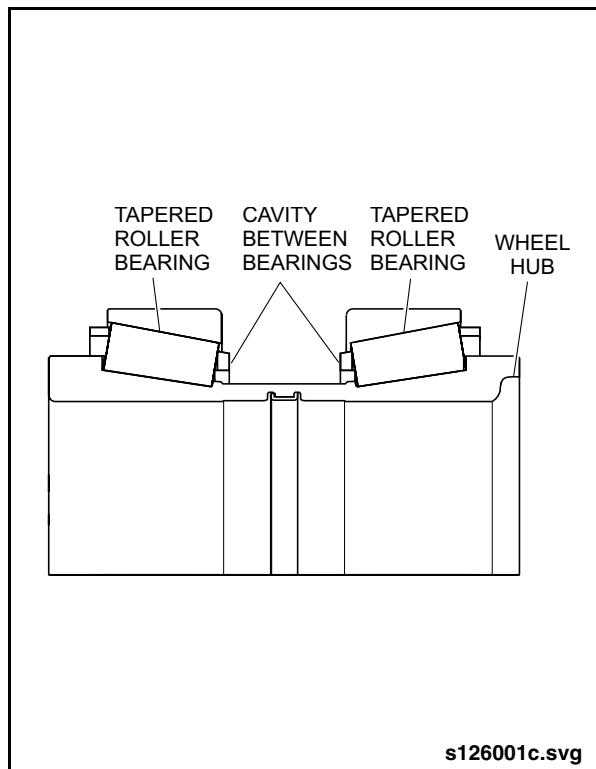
Greasing Hub Unit Wheel Bearings
